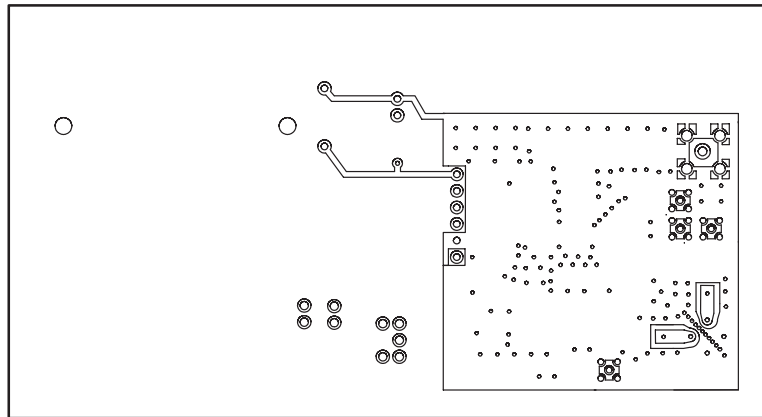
TRF1400 Demo Circuit Board Layout — Bottom Side
